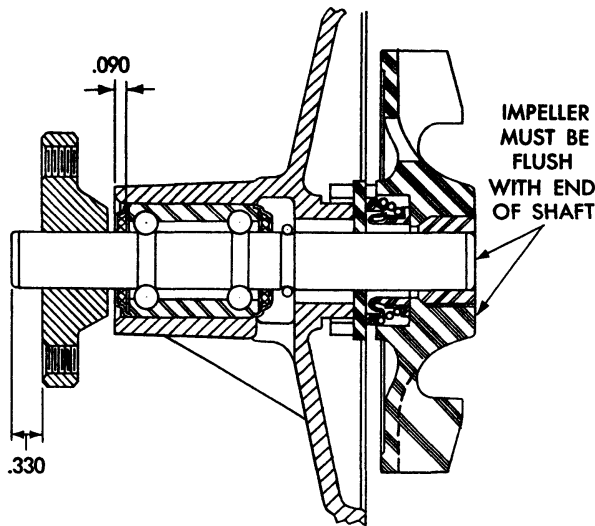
Installing Shaft and Bearing Assembly (Tool C-3468)
